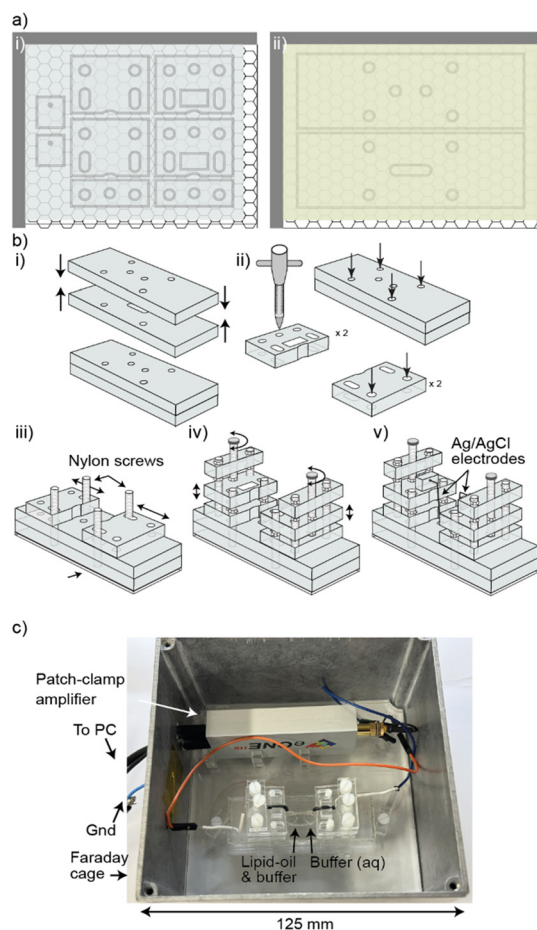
Rapid manufacturing and assembly of our CO₂ laser cut device. a) Laser cutting. Parts designed in CAD were laser cut from 5 mm thick sheets of i) plain PMMA or ii) PMMA prepared with double-sided adhesive. b) Assembly. i) The phase transfer column was assembled *via* the double-sided adhesive and ii) relevant holes (indicated by the arrows) were threaded using an M2 hand tap. iii) A glass slide was fixed to the base of the phase transfer column using double sided adhesive and nylon screws (with their heads removed) were inserted into the threaded holes to support the installation of a tray for moving the electrodes in the forward and backward directions. iv) Nylon screws (with their heads removed) were inserted into the threaded holes of the tray to support a second tray (with a cavity for the electrode holder) for moving the electrode up and down. A top bracket was installed to secure the assembly and to support an M2 screw that was threaded through the second tray. After the addition of nylon nuts in the indicated positions, the platform could be raised or lowered by turning the indicated screw clockwise or counterclockwise. v) Electrode holders housing Ag/AgCl electrodes were inserted into the cavities by push fit. c) A photograph of our setup placed inside our Faraday cage.
